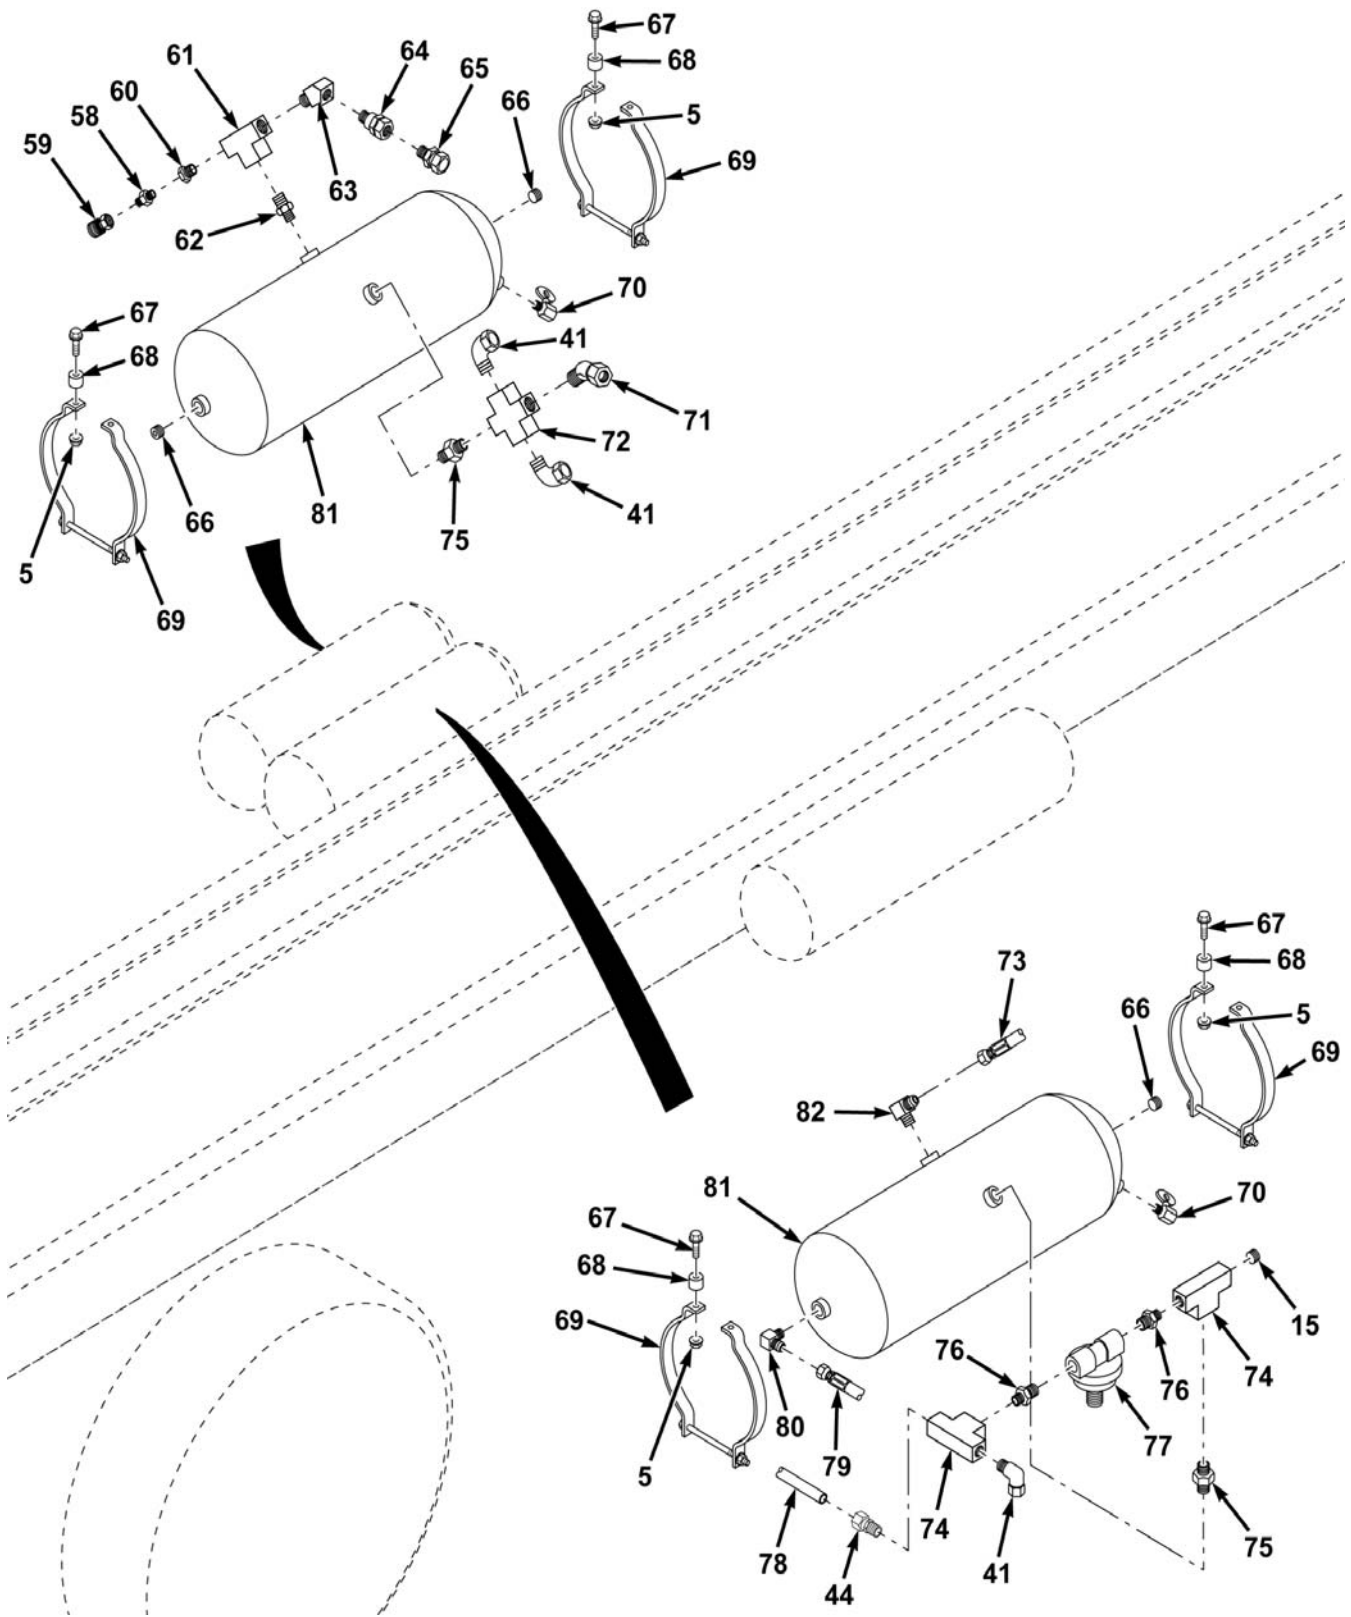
CHASSIS AIR (SHEET 3 OF 15)
